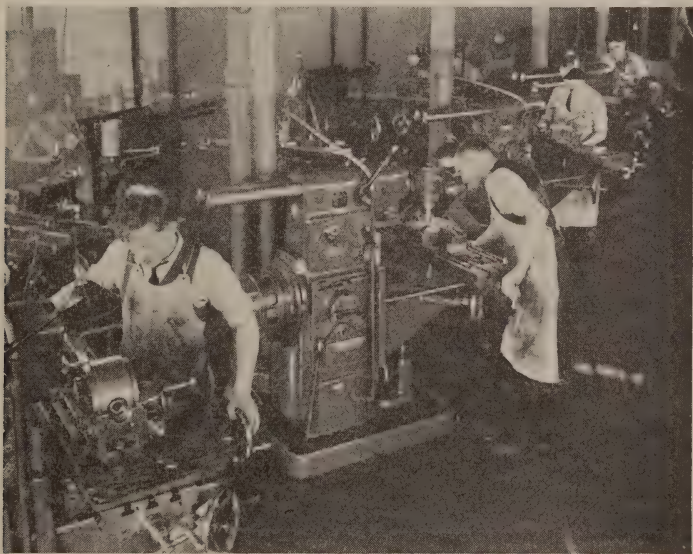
A group of milling machines in a toolmaking department. (Courtesy of The Taft-Pierce Manufacturing Company.)
